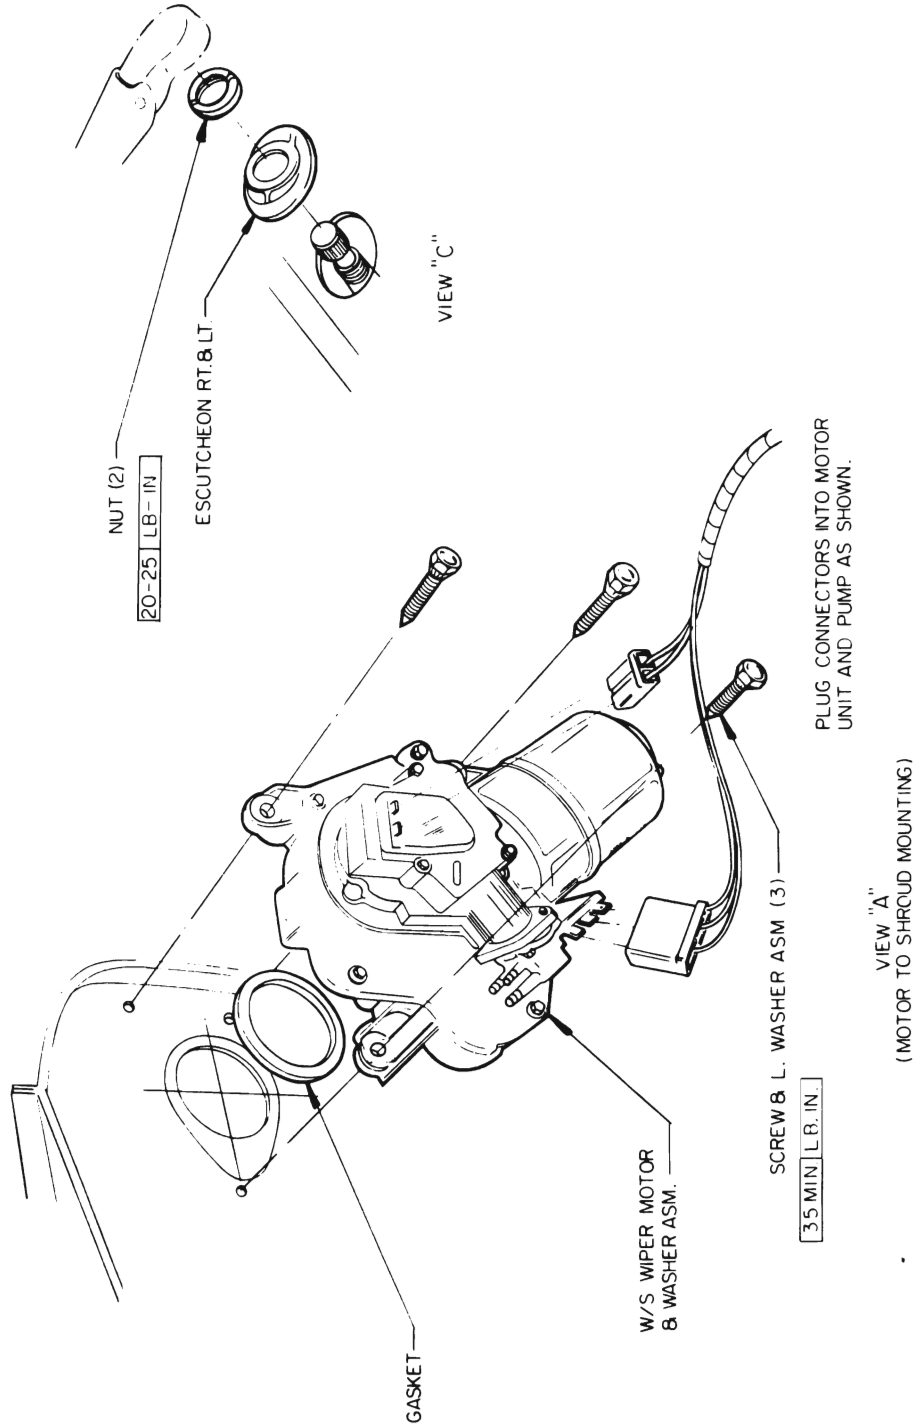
Windshield Wiper Motor Installation—Riviera
